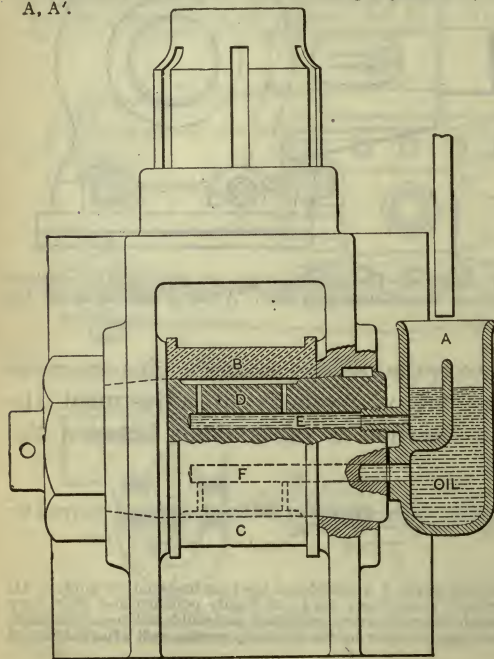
Reeves-Cubberley cross head for vertical engine showing sectional view of wrist pin and bearing with oiling device. In the cup there is a partition A, as shown, oil from the vertical pipe fills the oil cup on both sides of the partition A. One side of the partition connects with channel E, through which the top half of the cross head pin D, and connecting rod box B, is lubricated. When pressure is relieved between surface of pin D, and rod bearing B, oil on inside of the partition in cup flushes this space with oil; without this partition A, in the cup, oil would settle to the bottom of cup and the top surface of the pin would not get oil as it now does. Of course, the bottom side of cross head pin and bearing C, is oiled through channel F, in the manner described above.
